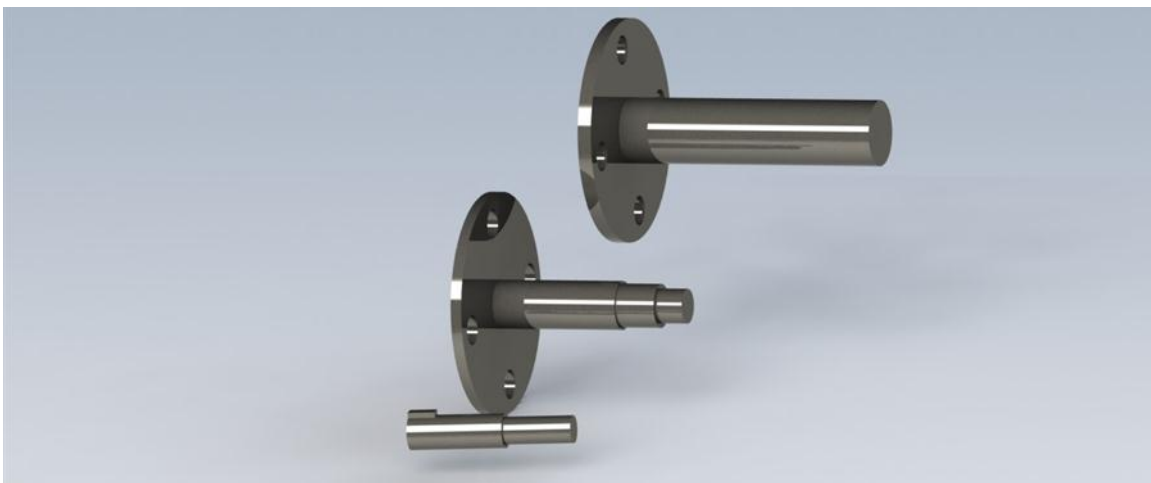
Shafting (from top to bottom) Braking Shaft, Clutch Shaft, and Pinion Shaft [17]
